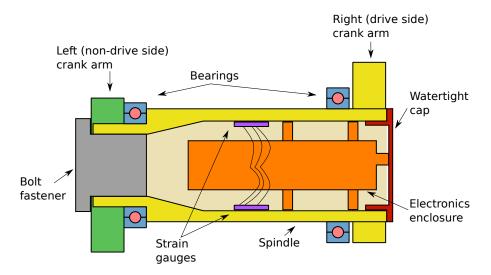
Schematic depiction of the Sram GXP bottom bracket with the powermeter assembly.
